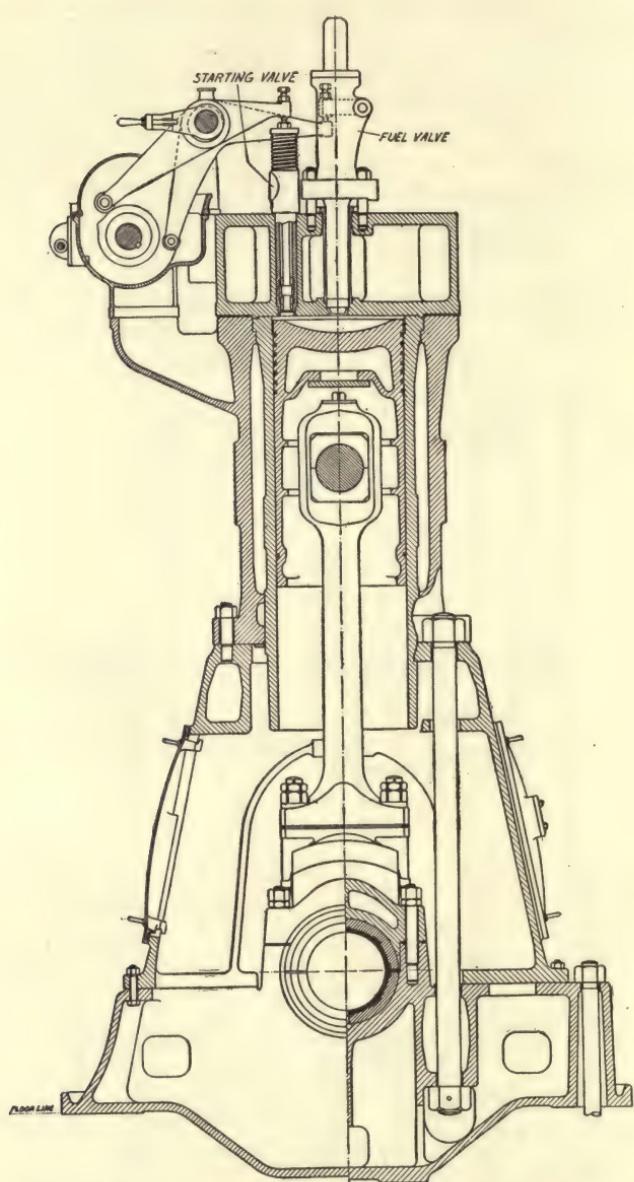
Busch-Sulzer Bros. Diesel Engine.
